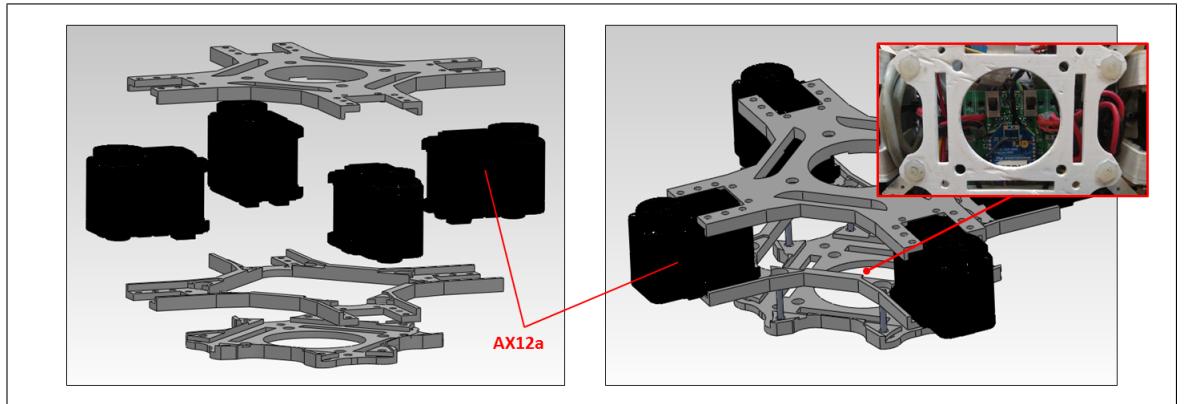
Root section of trunk. Call-out in top-right shows main-switch access through the bottom of the root module.
